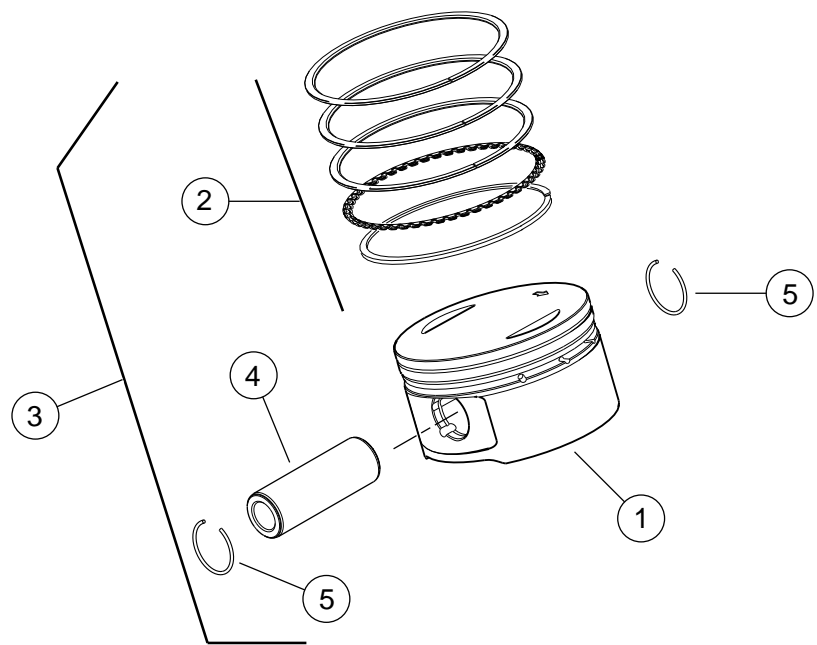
Service Parts: Twin Cam 88 Flat Top Piston Kit
